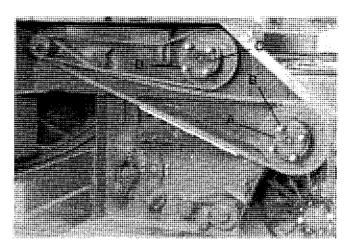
RIGHT HAND DRIVES (Shield removed for clarity)
